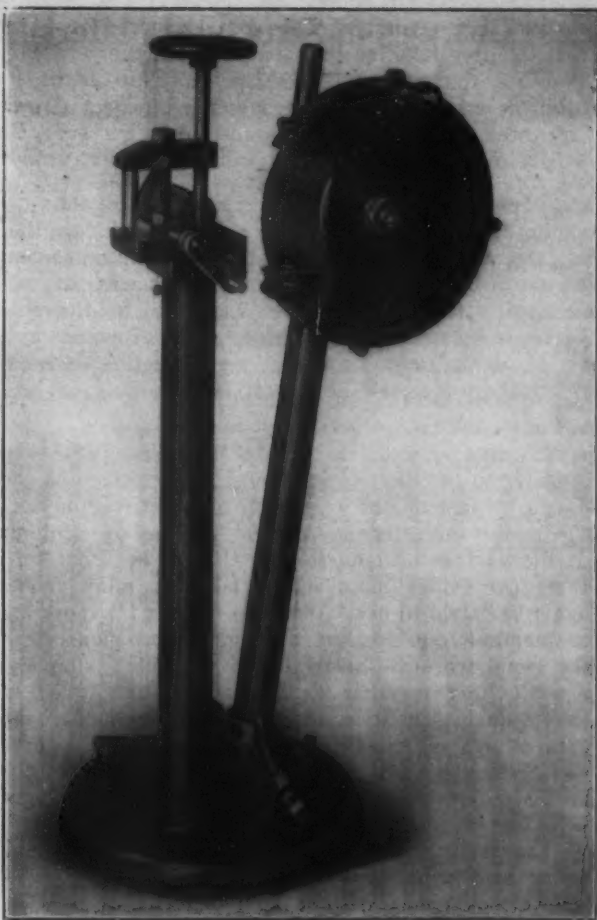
The Nutter & Barnes Elastic Wheel Metal Cutting Machine.
